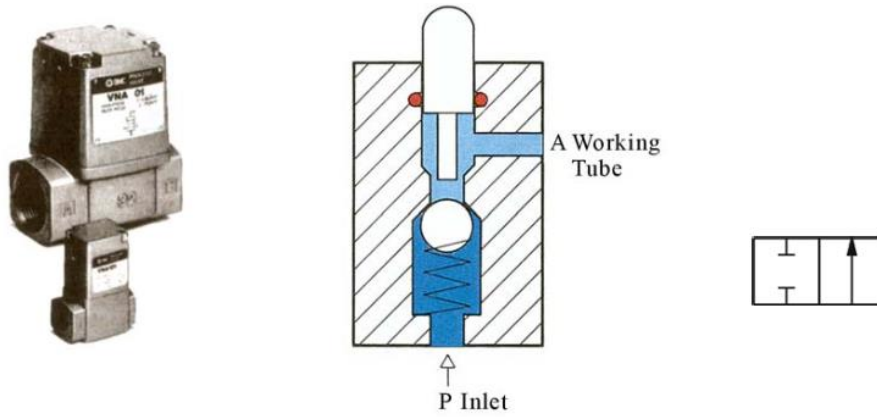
(a) 2/2 directional control valve (b) Cross section (c) Pneumatic symbol of a 2/2 directional control
